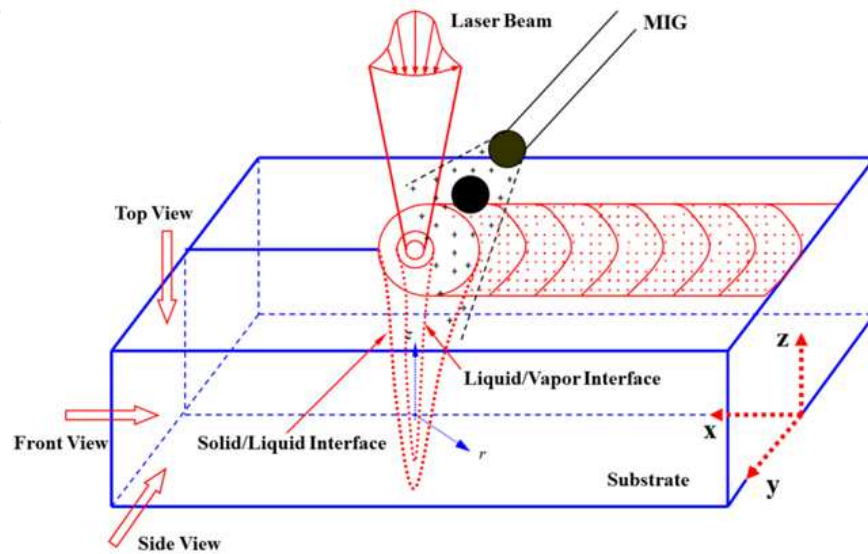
Schematic sketch of 3-D hybrid laser keyhole welding.
